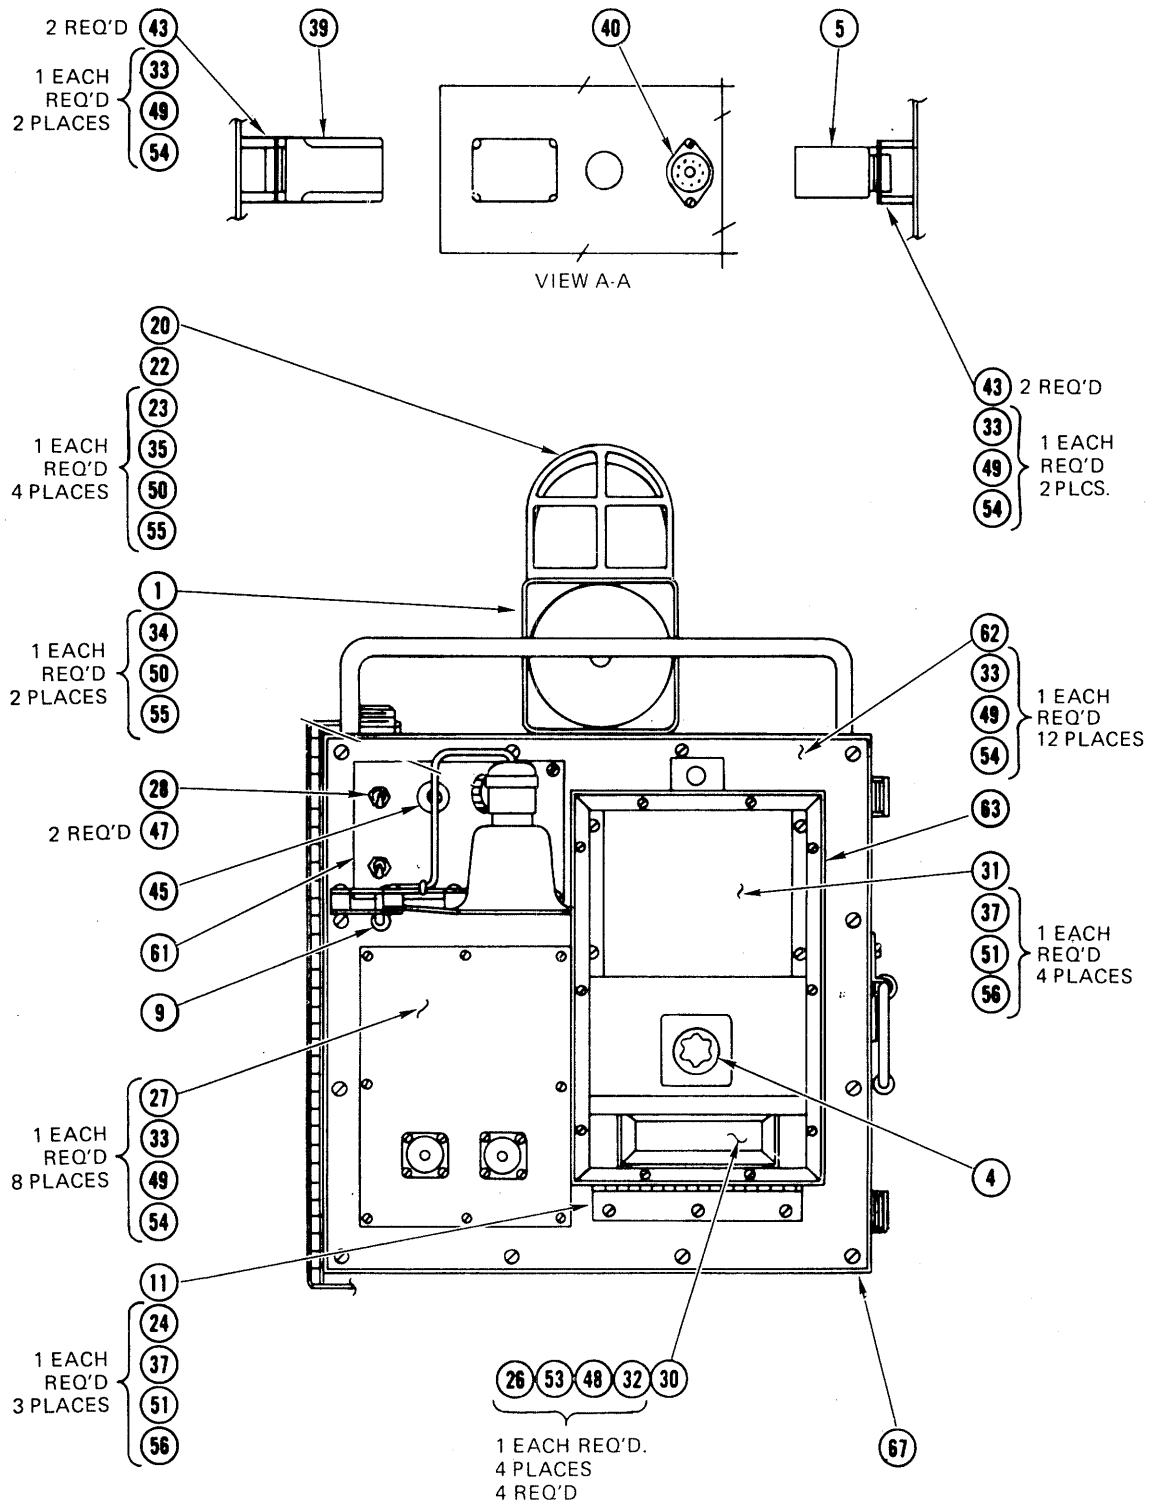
Batch Interface Detector Assembly (Sheet 1 of 2)
